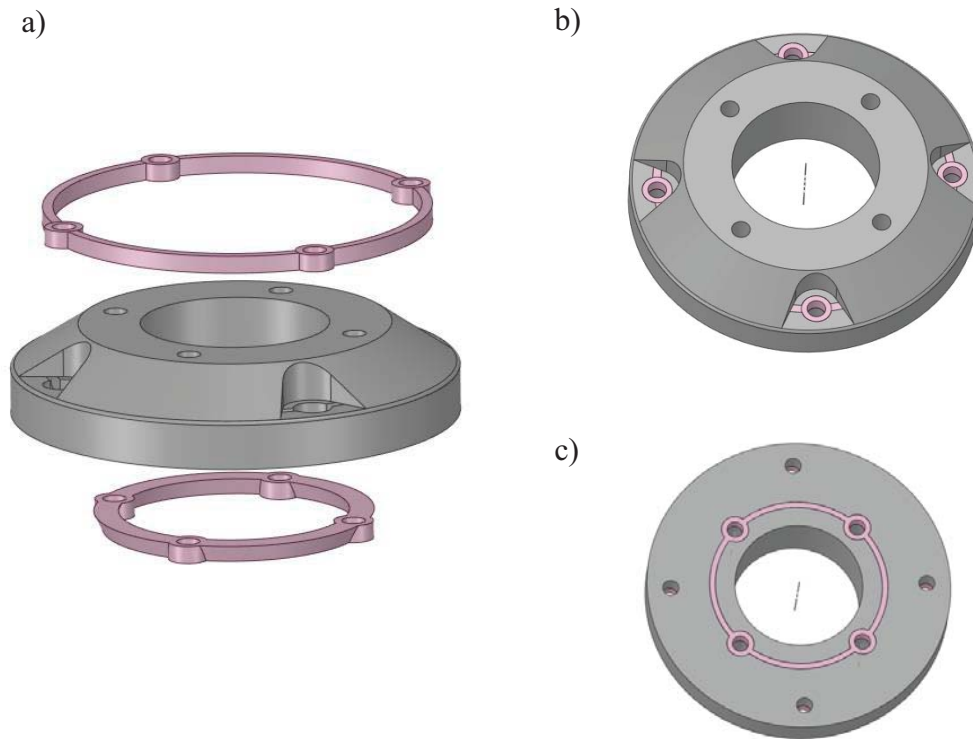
Metal inserts embedded in elastomer isolator: a) Exploded view; b) top view; c) bottom view
